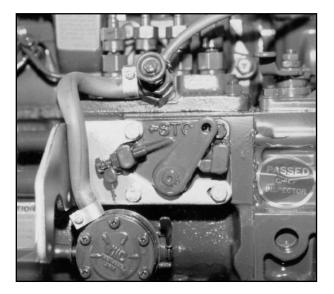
Fuel Pump Outlet Tube and Hose Interference with Solenoid Mounting Bracket
